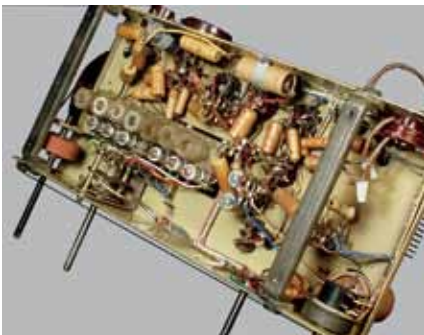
Unequaled skill in assembly with laced wiring harness. All connections and adjustments coated with red & green inspection lacquer.
